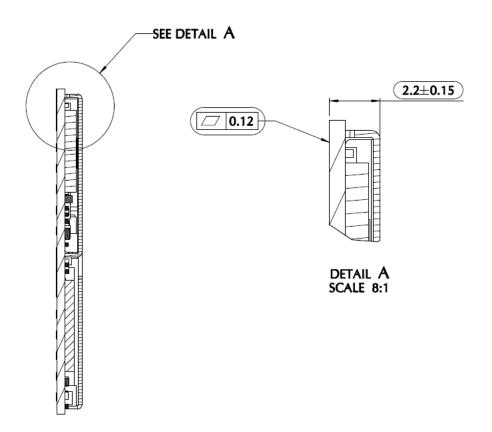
LE910Cx Mechanical Dimensions (Side view) except for LE910C1-SV and -SVX
